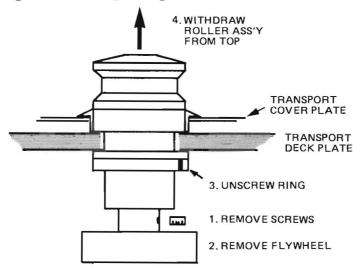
IMPEDANCE ROLLER DISASSEMBLY
